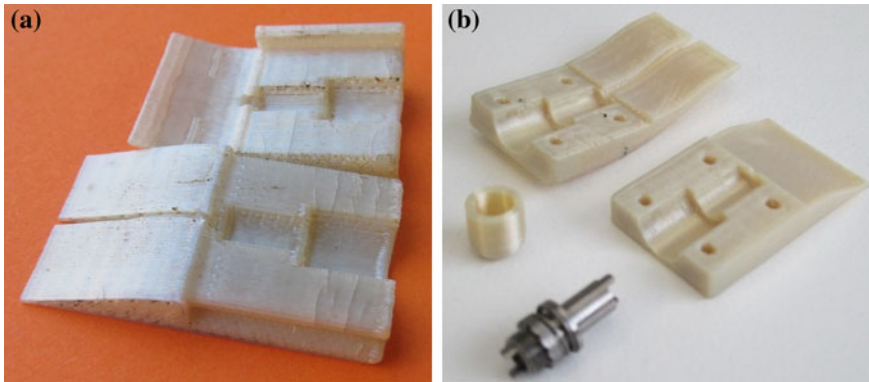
3D-printed connector casing prototypes, *left* PPSU first prototype and *right* PEI second prototype
